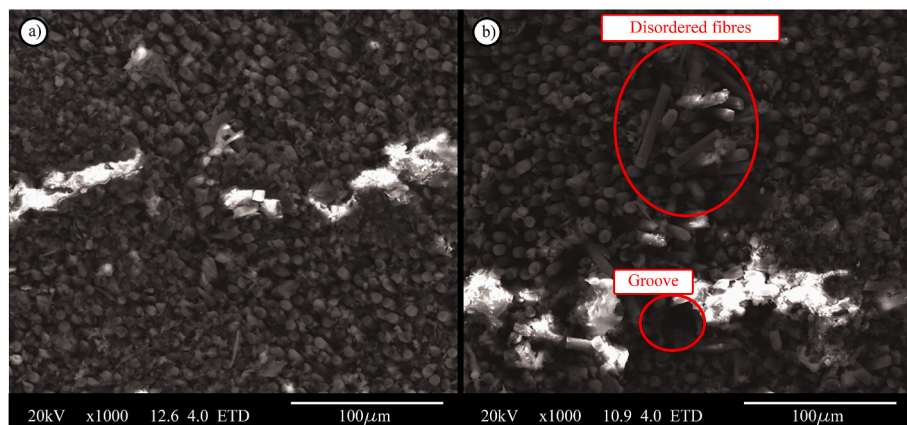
Comparison of machined composite surfaces by different tools: (a) the right-edge milling tool; (b) the left-right edge milling tool, redrawn based on Ref. [210].
